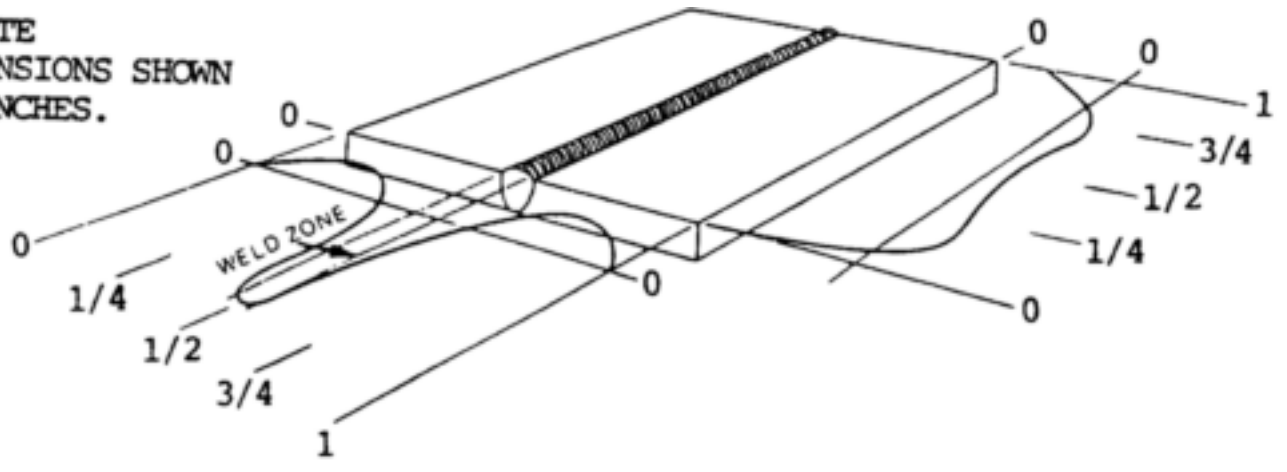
Butt welded joint -- residual stress pattern.
